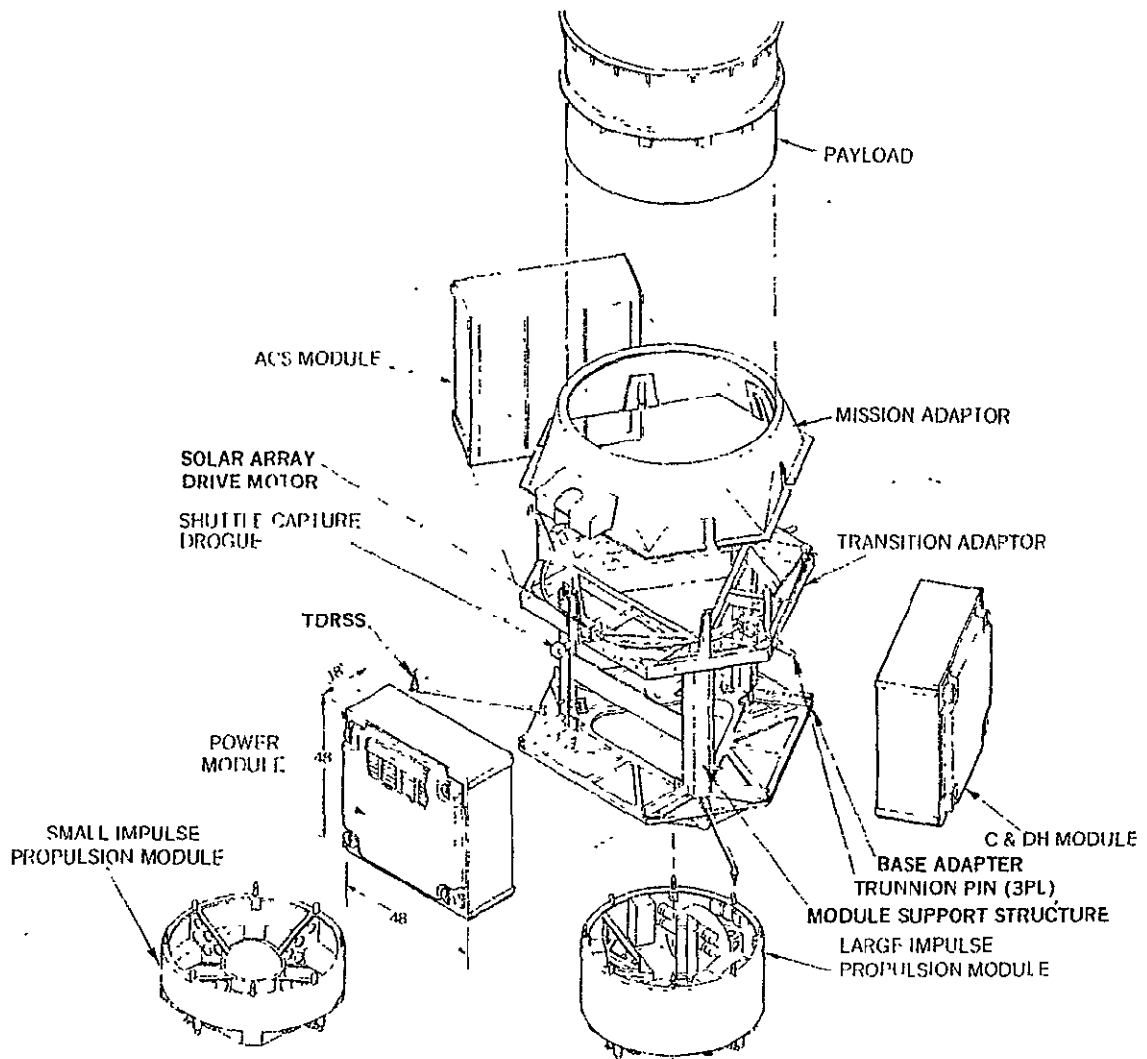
Multi-Mission Modular Spacecraft (Exploded View)
